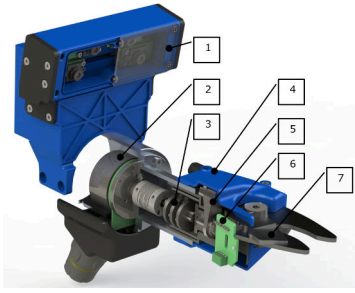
3D design of the clipping tool. 1: 2 pairs of cameras in a 3D printed housing, 2: DC motor, 3: gear box, 4: protective cover, 5: drive lever of cutting blade, 6: position feedback switches, 7: cutting blade.
